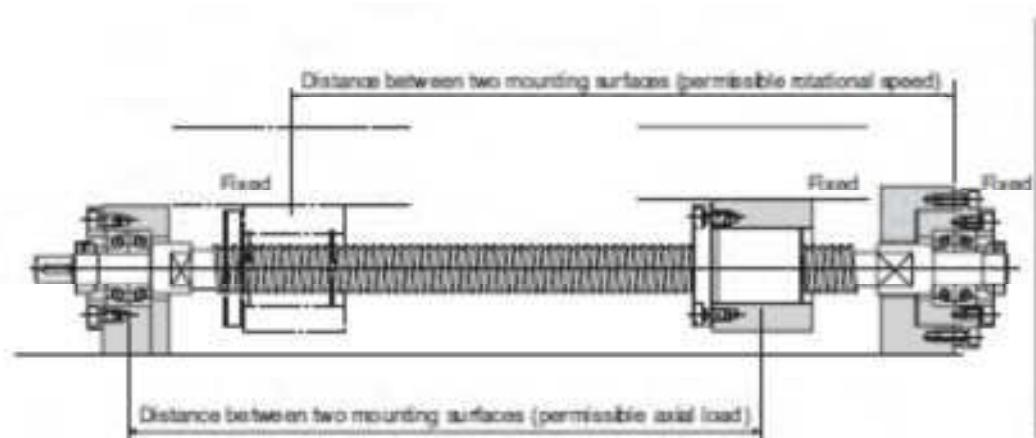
Screw Shaft Mounting Method: Fixed - Fixed
